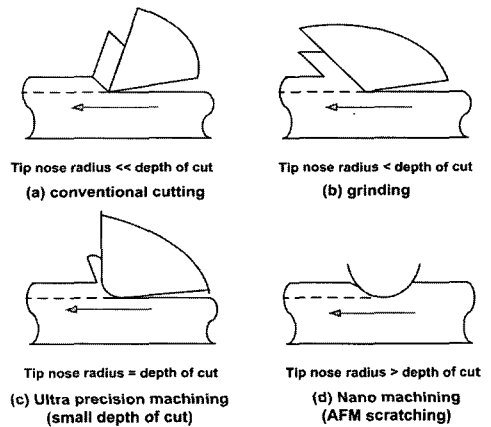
Effect of Tool nose radius and depth of cut in machining⁽¹²⁾
